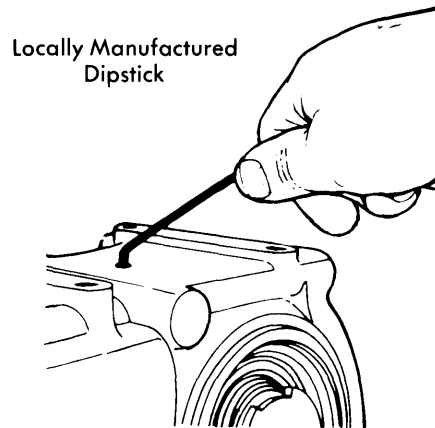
Checking Compressor Oil Level Horizontally Mounted Unit
